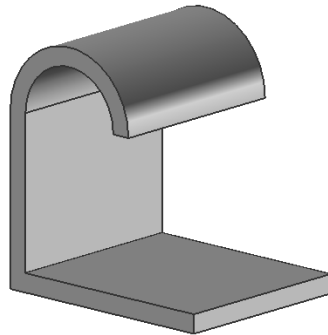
Isometric view of the resulting thin extruded feature
